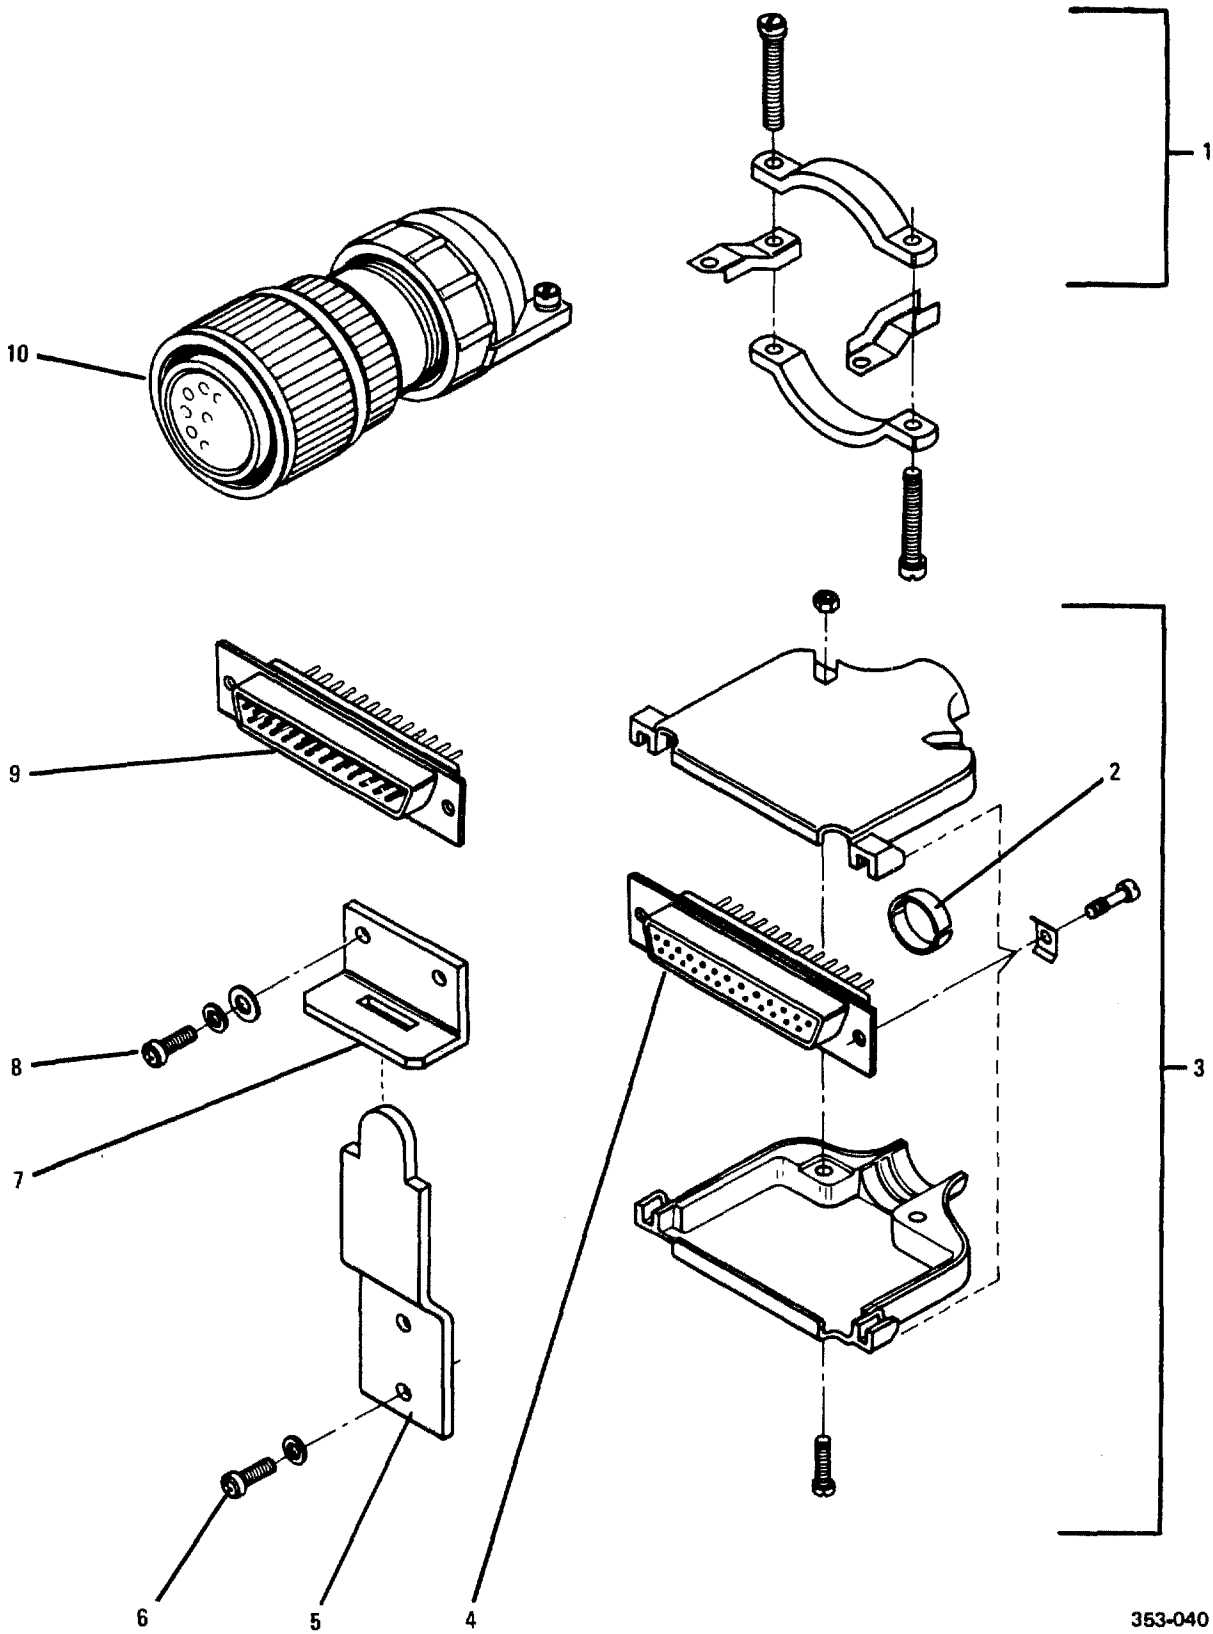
1 KW LPA, AM-7224/URC, Exploded View
